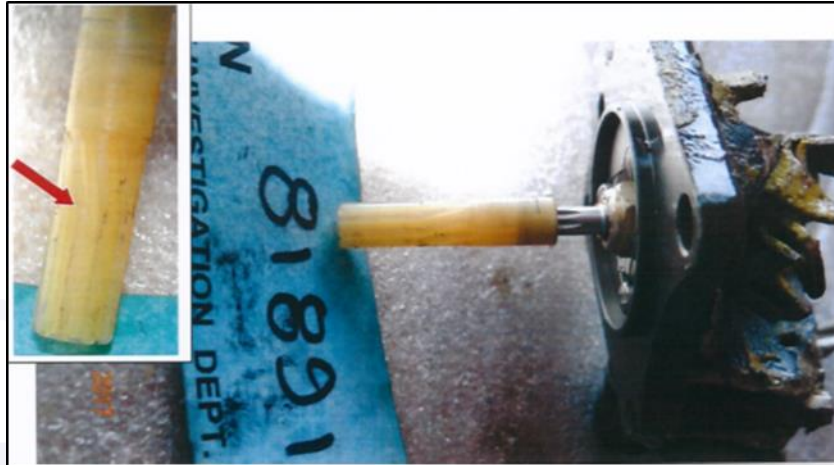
Right engine FCU drive shaft. In detail, the misalignment of stretch marks.
